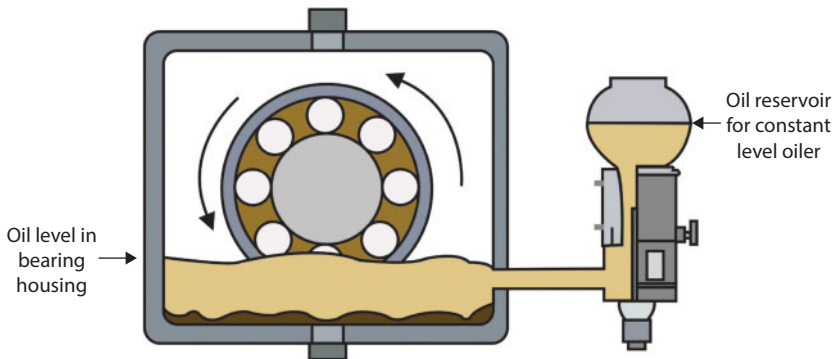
View of constant level oiler with ball bearings contacting oil in sump.
